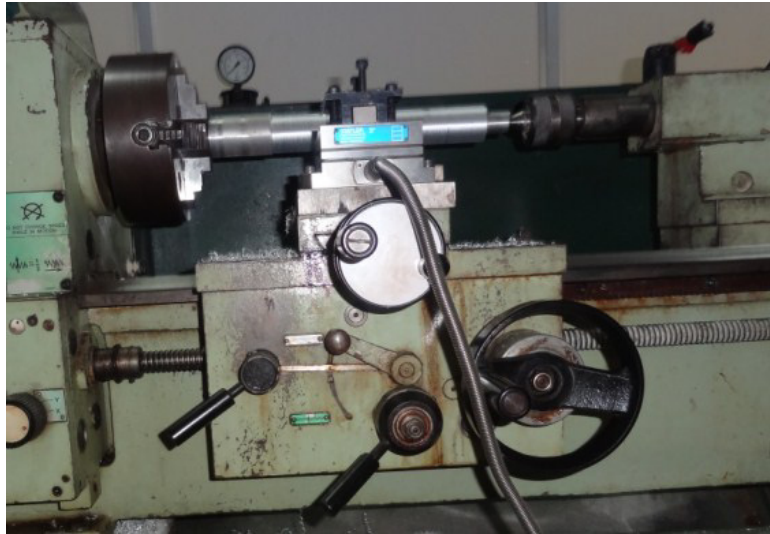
Experimental setup of Lathe and Lathe tool dynamometer
